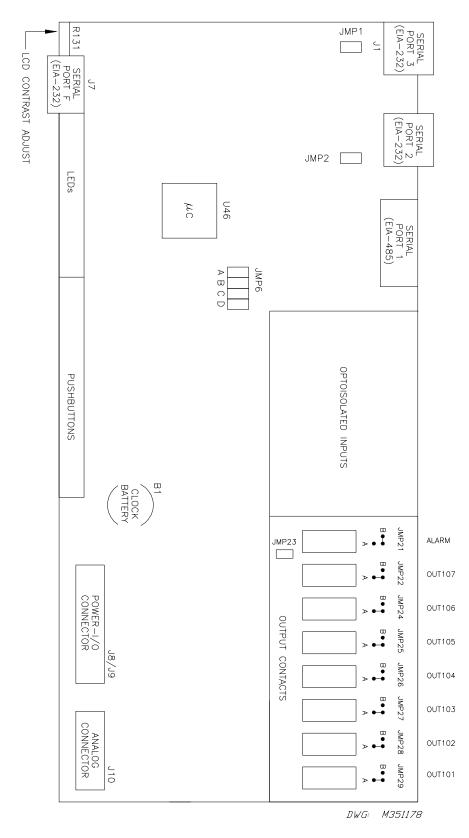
Jumper, Connector, and Major Component Locations on the SEL-311A Relay Main Board
